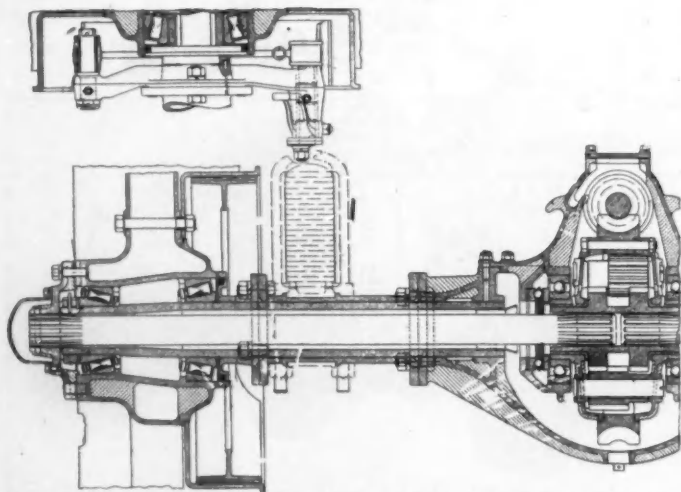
WORM MOUNTING OF A LARGER TYPE OF AXLE SHOWN IN FIG. 16
